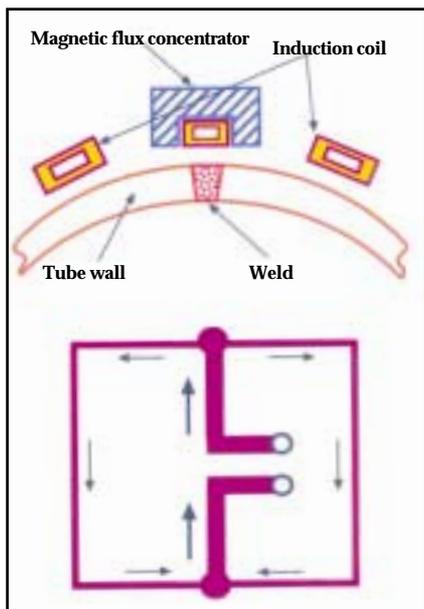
Split-return seam annealing inductor, top, and diagram of its electrical circuit, bottom. (Ref. 1)
